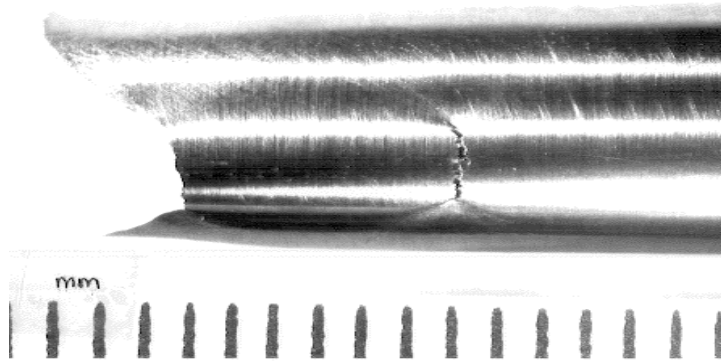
Hydrogen cracking observed on the barrel of an MIL-120S all weld metal tensile specimen.
